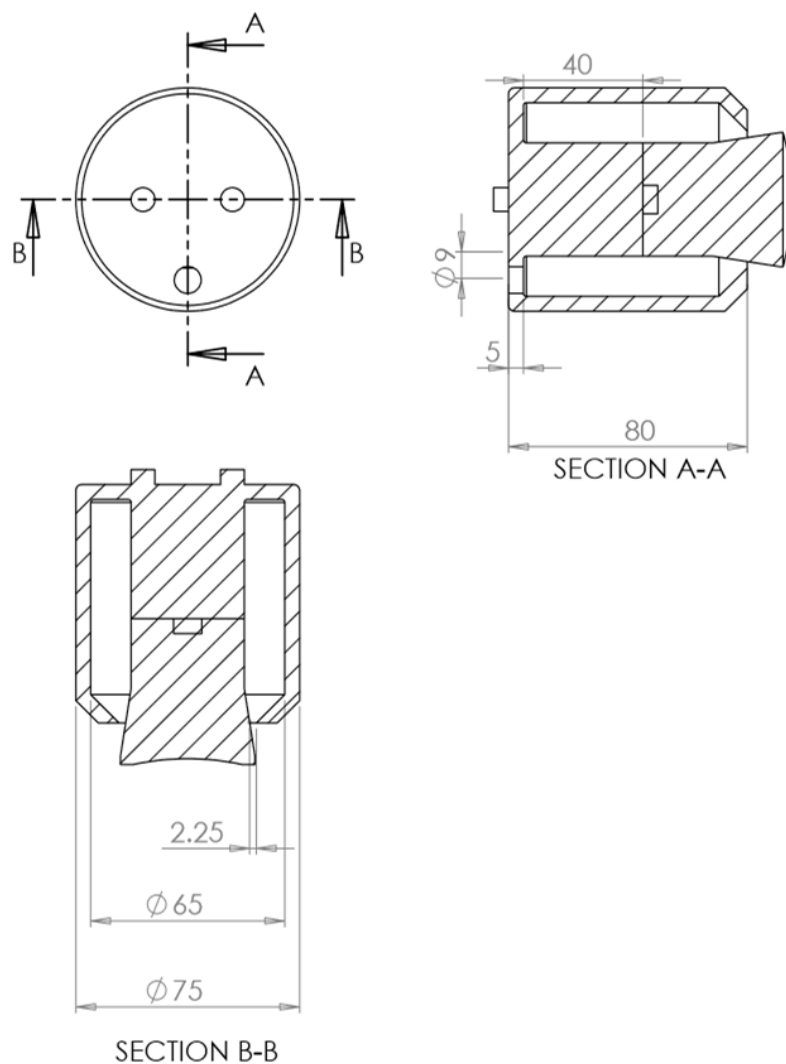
Technical drawing of 3D printed housing to encapsulate the 40 kHz HPUT
